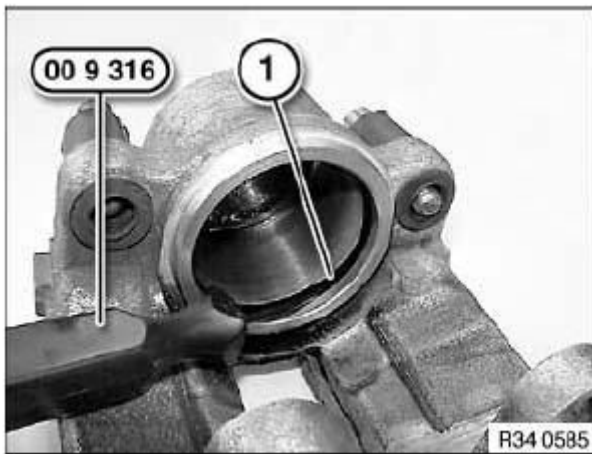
Removing Sealing Ring Using Special Tool (00 9 316)
